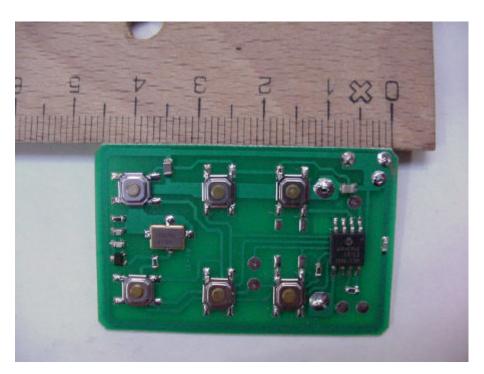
vehicle remote keyless entry transmitter: 4F2T-15K601-A, rear view
